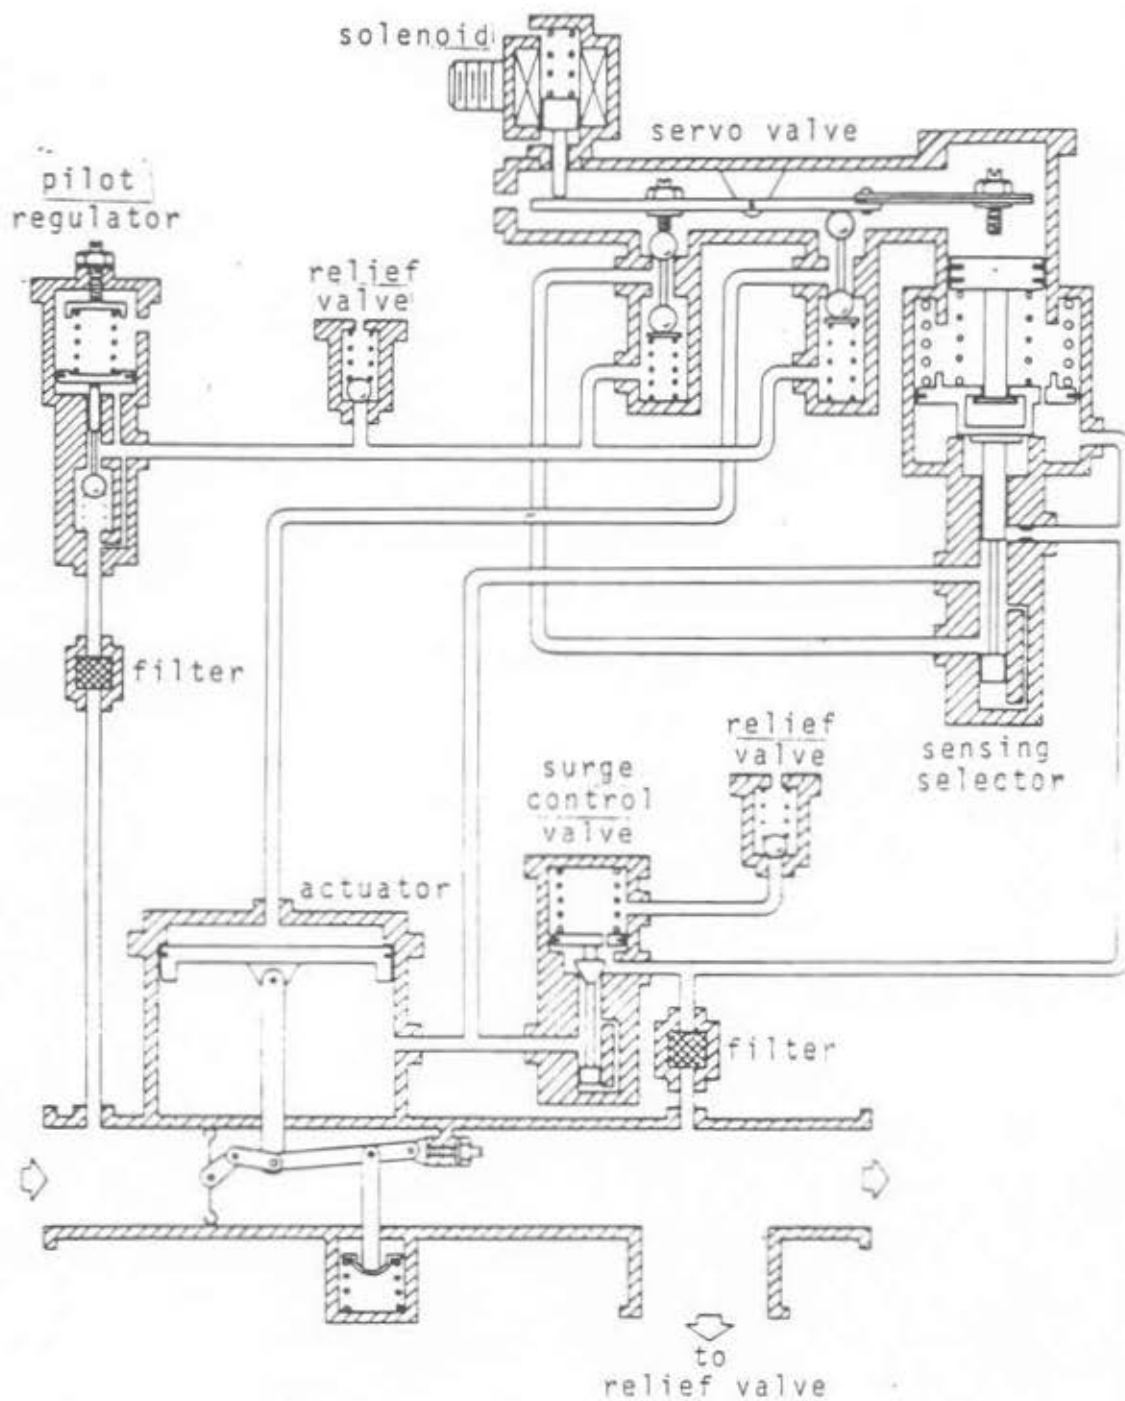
BLEED AIR SYSTEM PRESSURE REGULATOR VALVE
